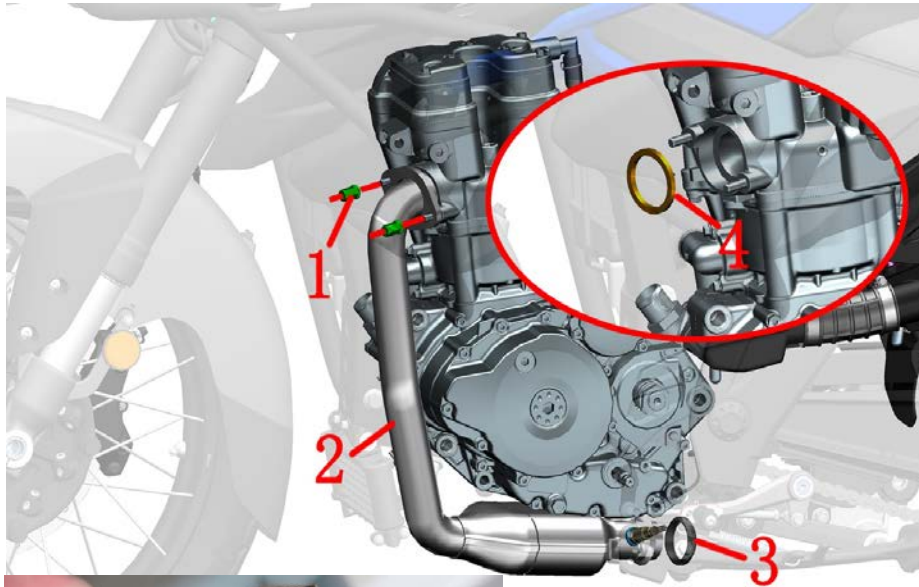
Muffler Assembly		Muffler Assembly 3		CHK	CAUTION
